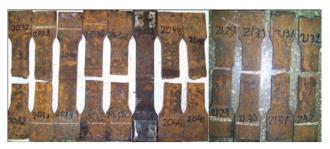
General view of butt welded joint specimens strengthened by HMP technology after holding in the KST-1 chamber for 1200 h and fatigue tests
